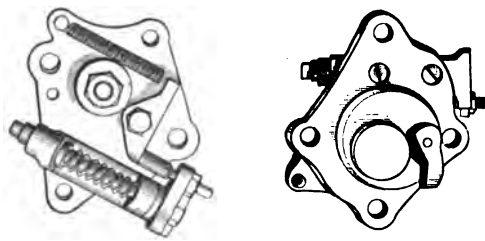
Igniter Block, Fay & Bowen Engine.
